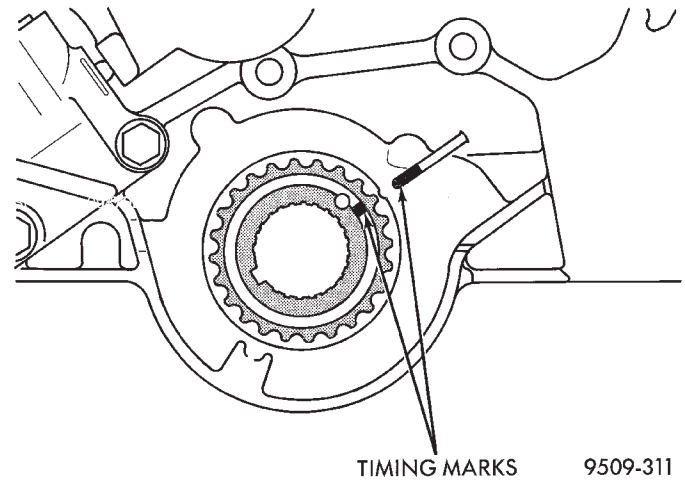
Adjusting Crankshaft Sprocket for Timing Belt
